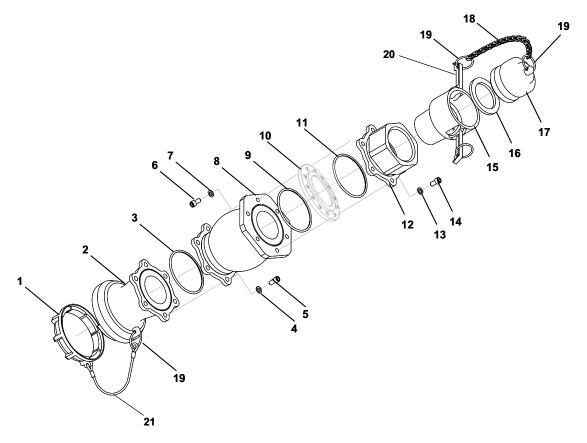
2 In. Female Inlet, 2 In. Unisex Outlet Pressure Regulator.
